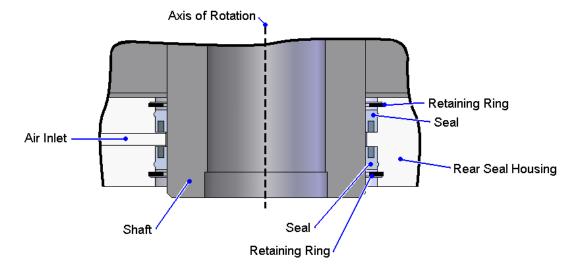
Cross-section View of Rear Seal Showing Seal Orientations
